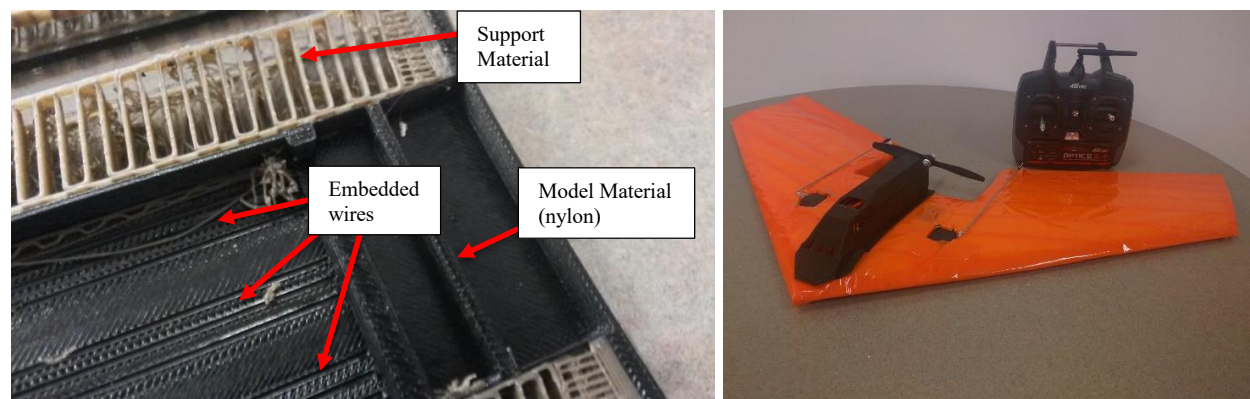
32 AWG copper wire printed over for a FDM-printed UAV fuselage (left). Actual view of a FDM-printed UAV (left).
